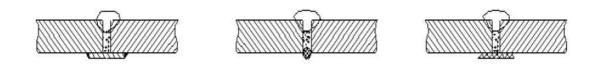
Schematic diagram of flux backing welding
